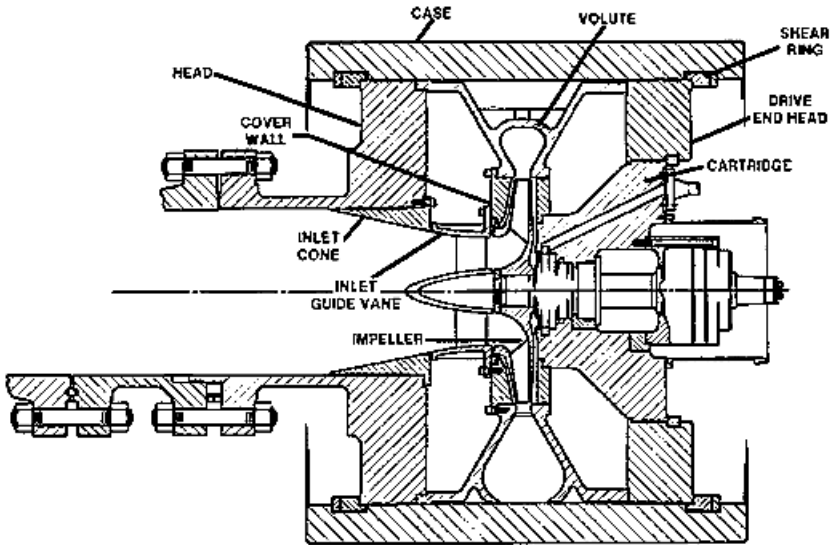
Cross-sectional view of a single-stage overhung impeller type of compressor. (*Dresser-Rand Company, Olean, N.Y.*)
